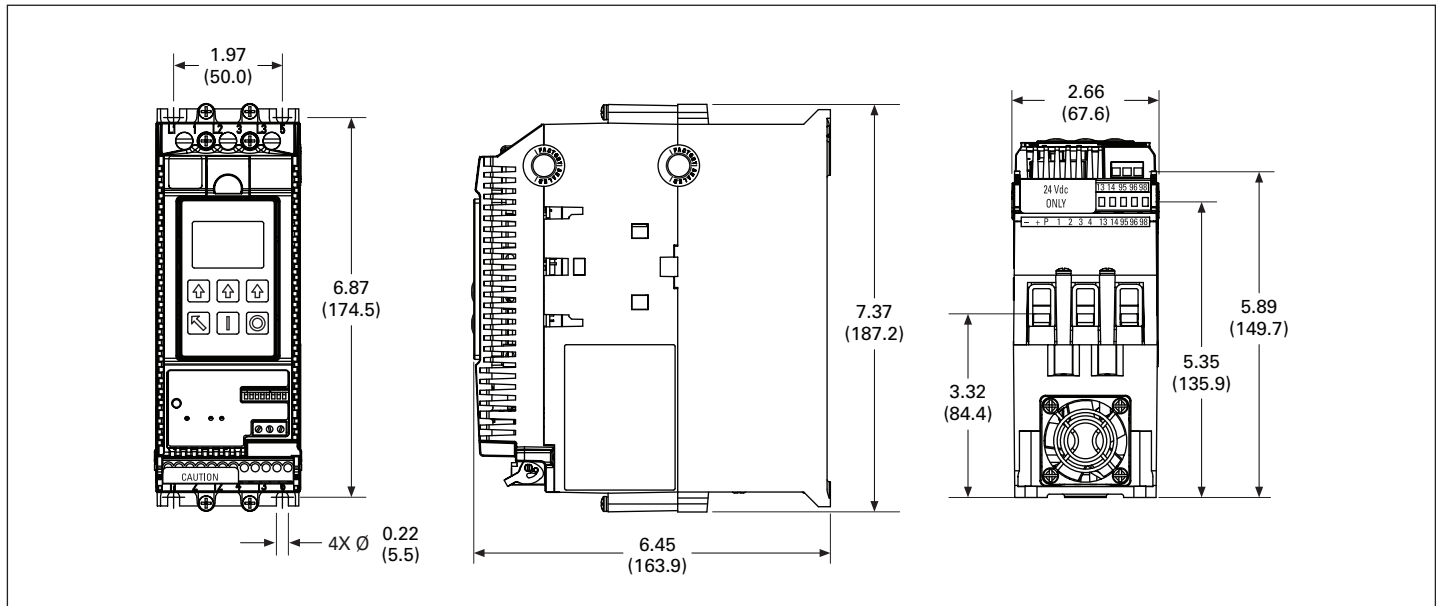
N-Frame (65 mm) S811+ Approximate Dimensions in Inches (mm)
